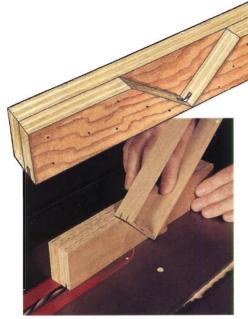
A spline kerf jig is easy to make, as shown above. Just be sure to test the blade height setting with scraps before moving on to your workpiece.
